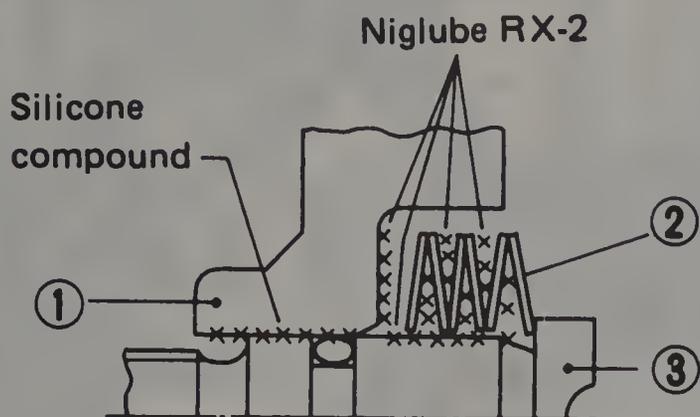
Correct places to apply special lubricants (Sec 7)
